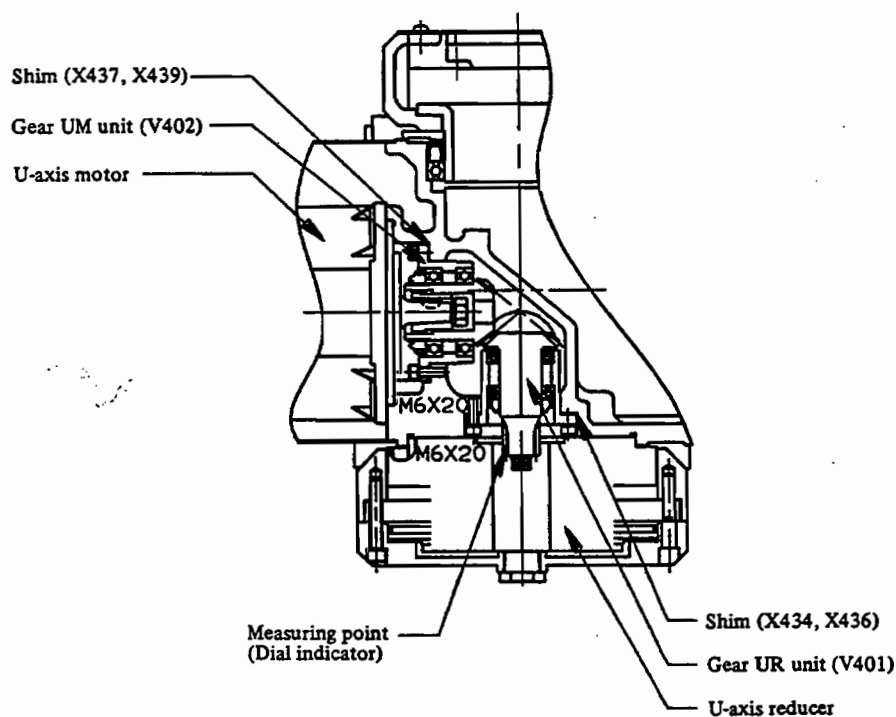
(b) Adjusting U-axis bevel gear backlash
